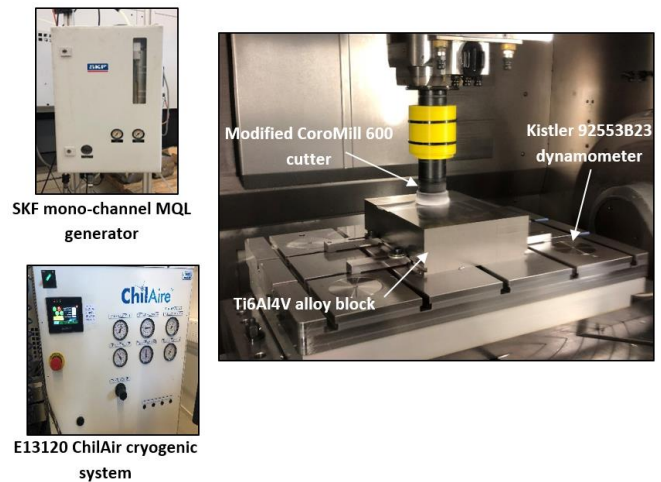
Experiment set up with modified CoroMill600 milling cutter.
